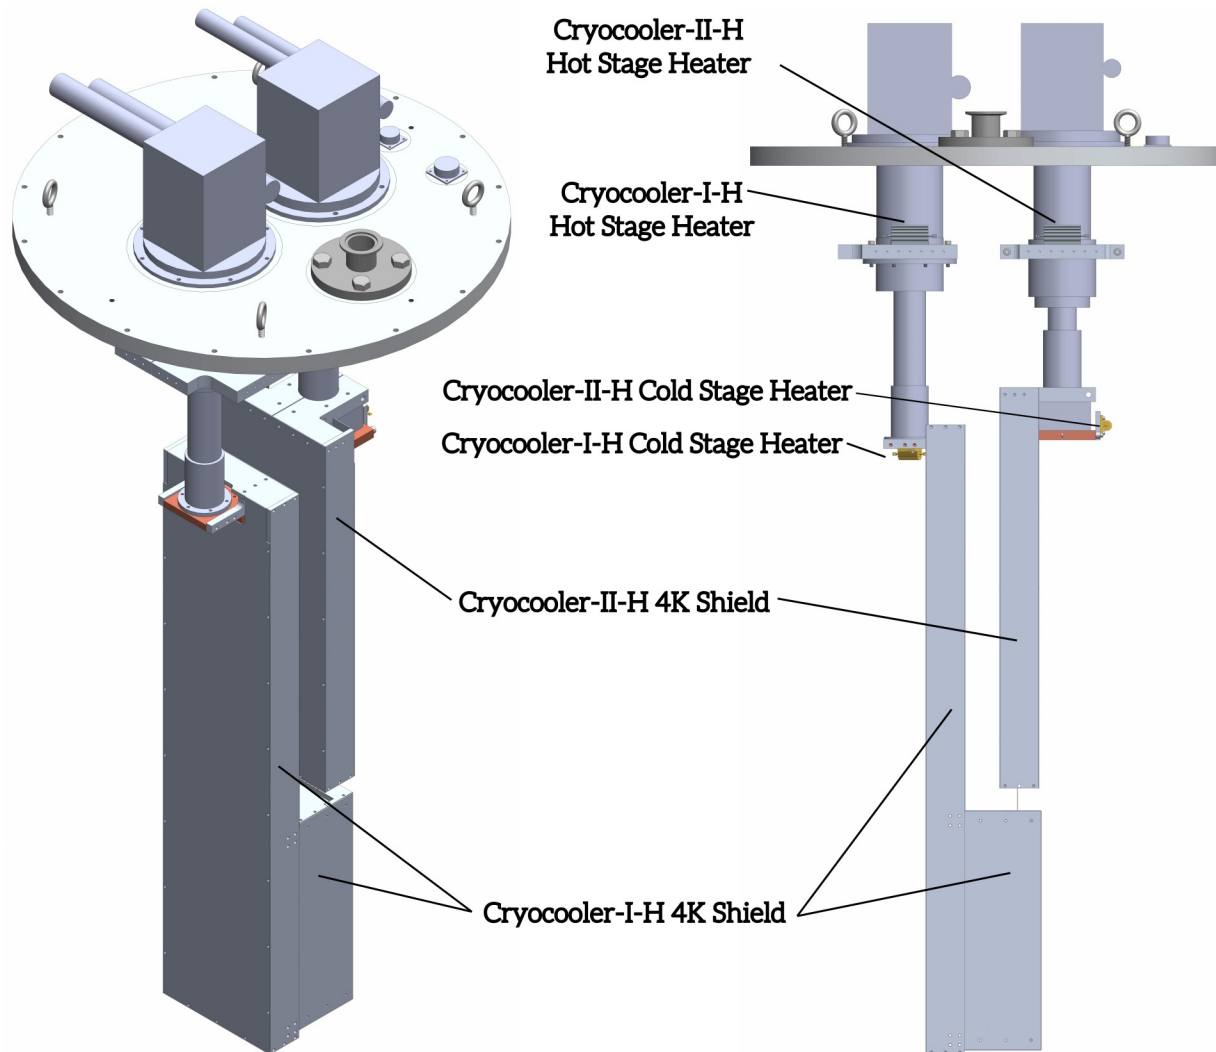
Solid model assembly views of the helium PHP thermal switch test facility with all 70 K shields and structure removed.
